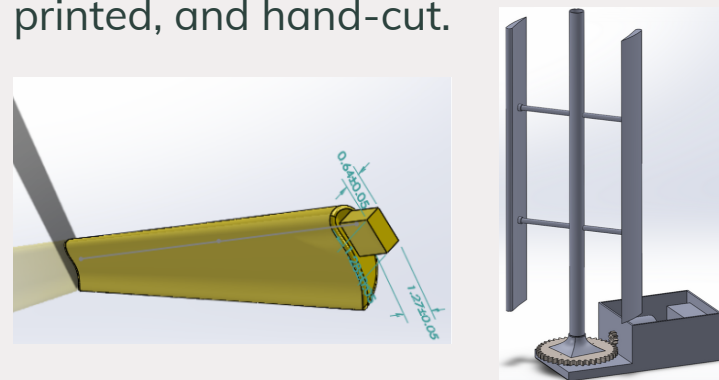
Horizontal axis blade and vertical-axis turbine design in SolidWorks
